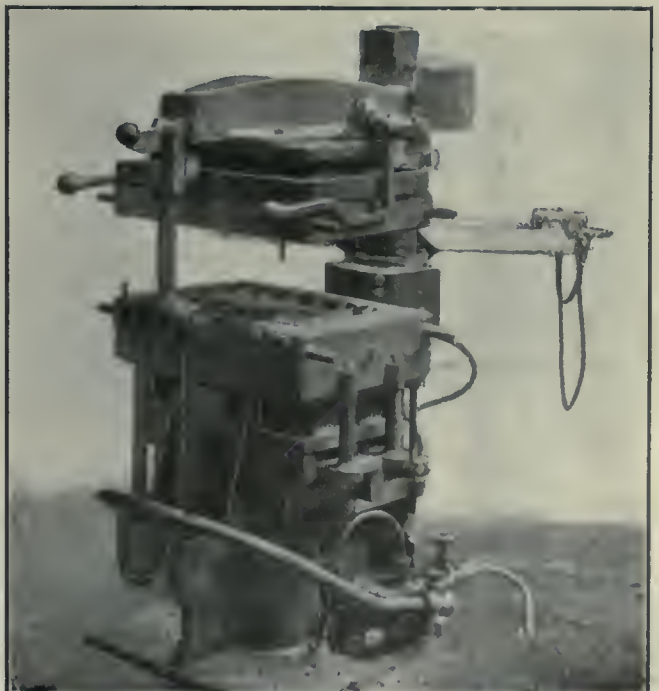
MACHINE WITH PATTERN PLATE SWUNG OUTWARDS, READY FOR CLOSING MOLD.
